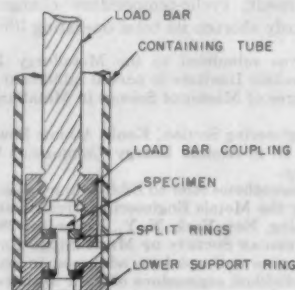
SPECIMEN AND LOAD-BAR ASSEMBLY—LOWER PORTION
